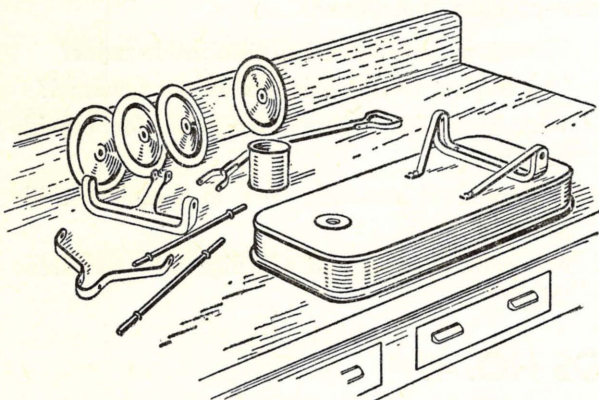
Painting and cleaning will be easier if the removable parts are removed
